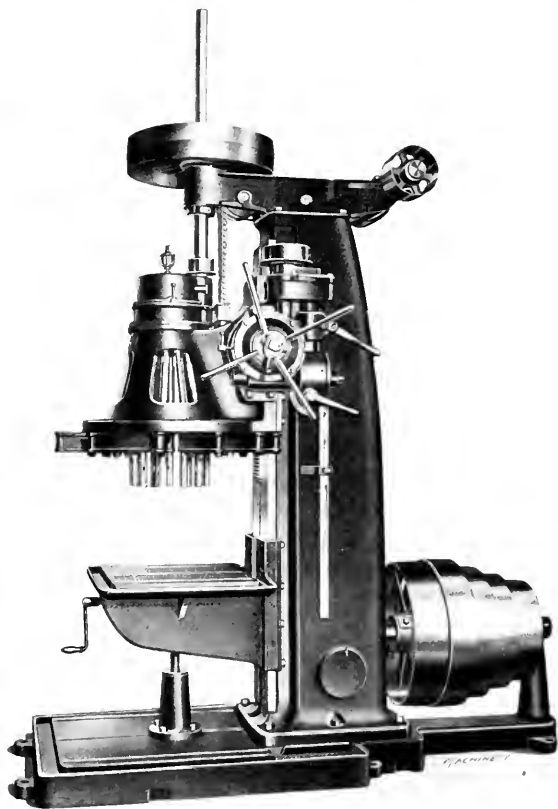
Harrington No. 51 Multiple Spindle Drilling Machine
